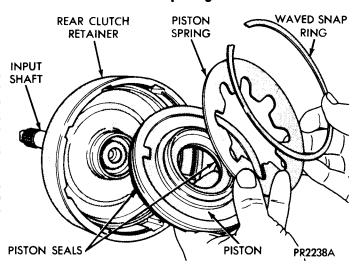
Remove or Install Rear Clutch Piston and Piston Spring
